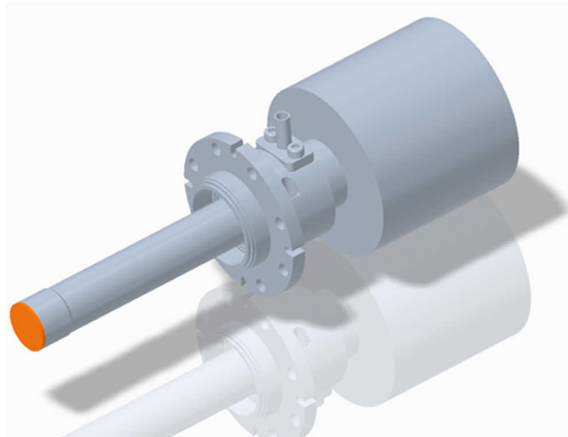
CAD render of the dismountable LPT9510 pulse-tube cold finger for IDCA applications. The cold tip has been modified (low CTE material), a weld flange is added to the mounting flange and dismountable gas and buffer connections are present.
